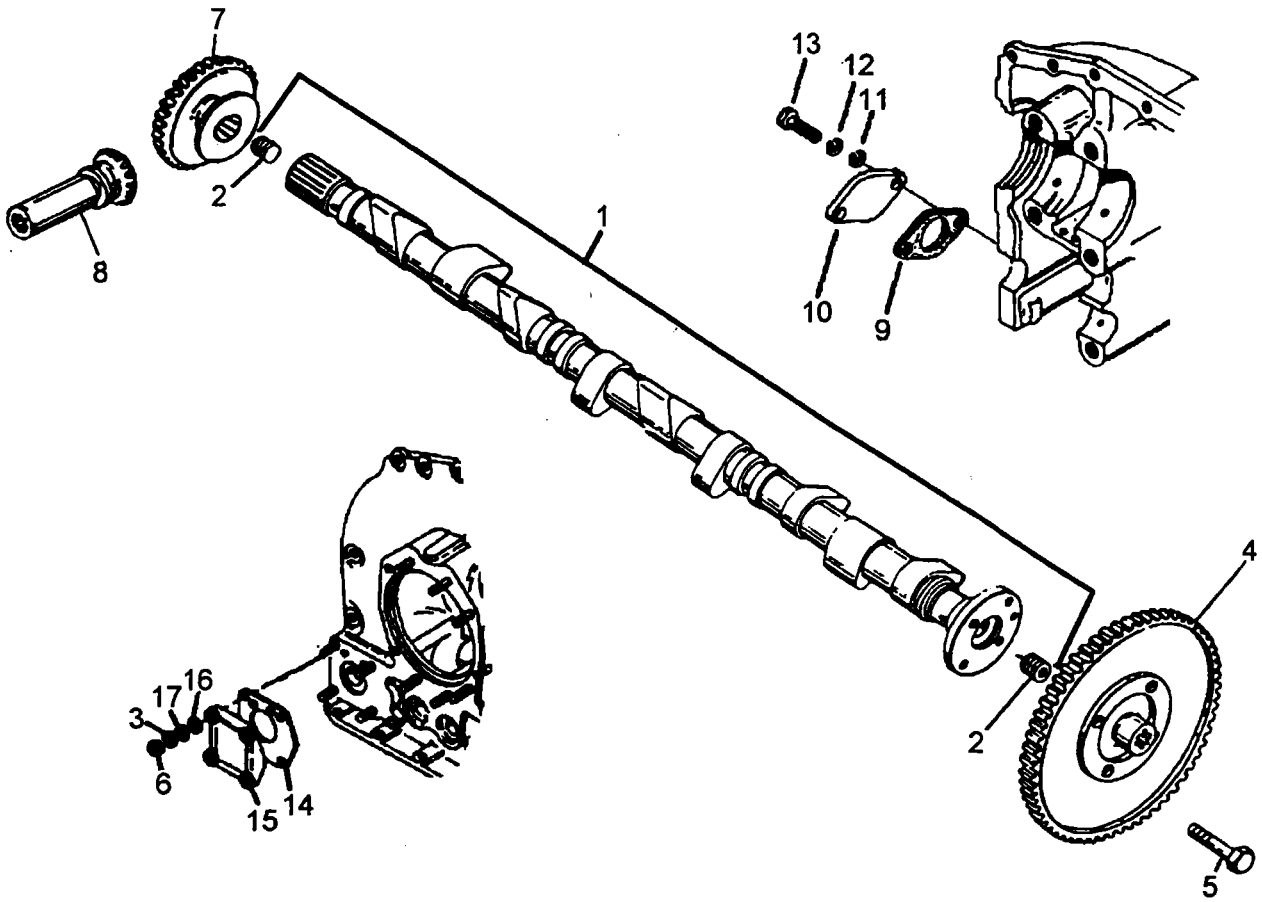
CAMSHAFT & ASSOCIATED PARTS
